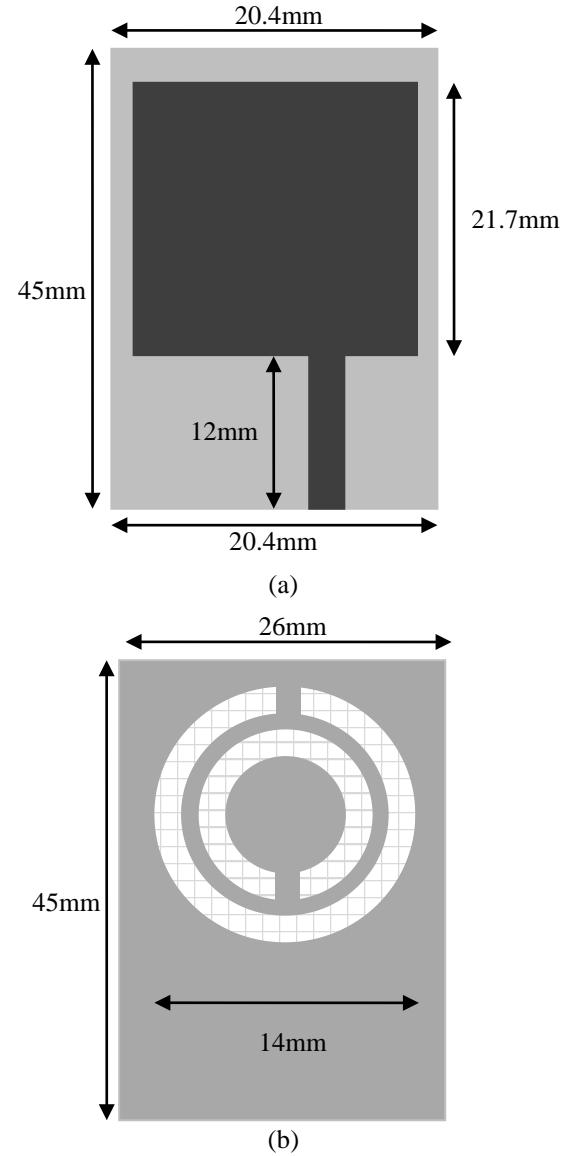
Proposed antenna (a) Front view (b) Bottom view
